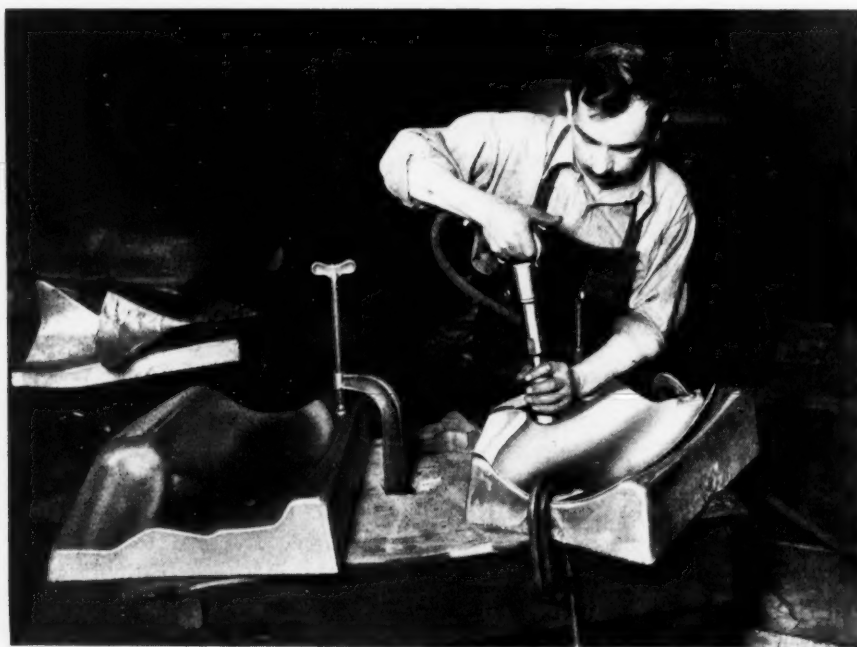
Sheet-metal Parts are Also Produced by Using Hand Tools to Shape Them on Zinc Forms
